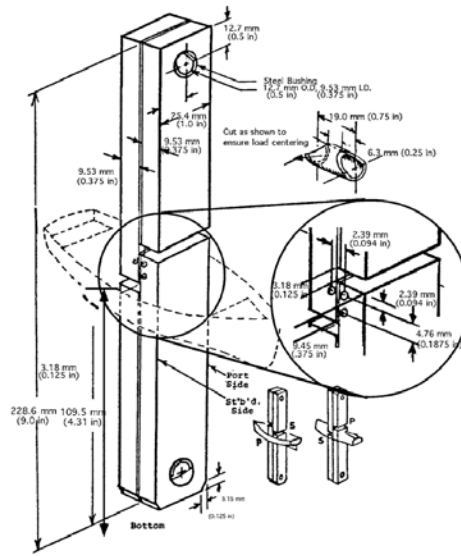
ASTM D5656 thick adhesive shear testing.
